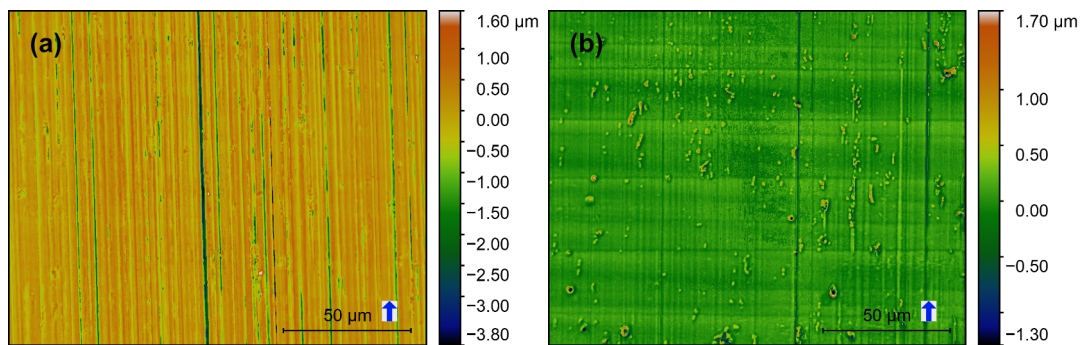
Confocal microscopy images of AA6082 surfaces milled with $f_z = 8 \mu\text{m}$: (a) SC-tool, (b) MD-tool.
